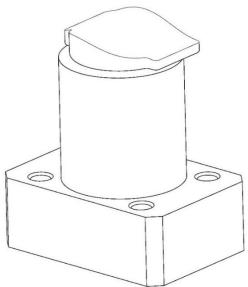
Block valve adapter ¼ NPT for low pressure gases measurement - view in isometry.
